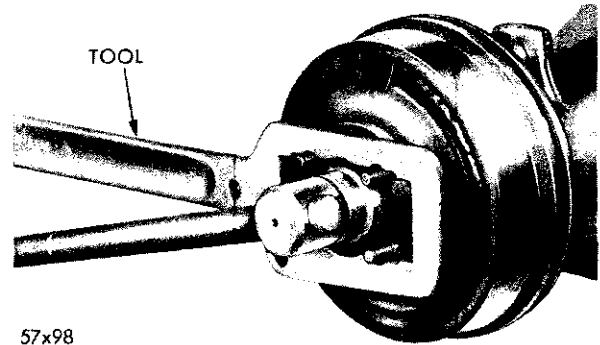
Removing Handbrake Drum and Flange (Assembly Nut)
